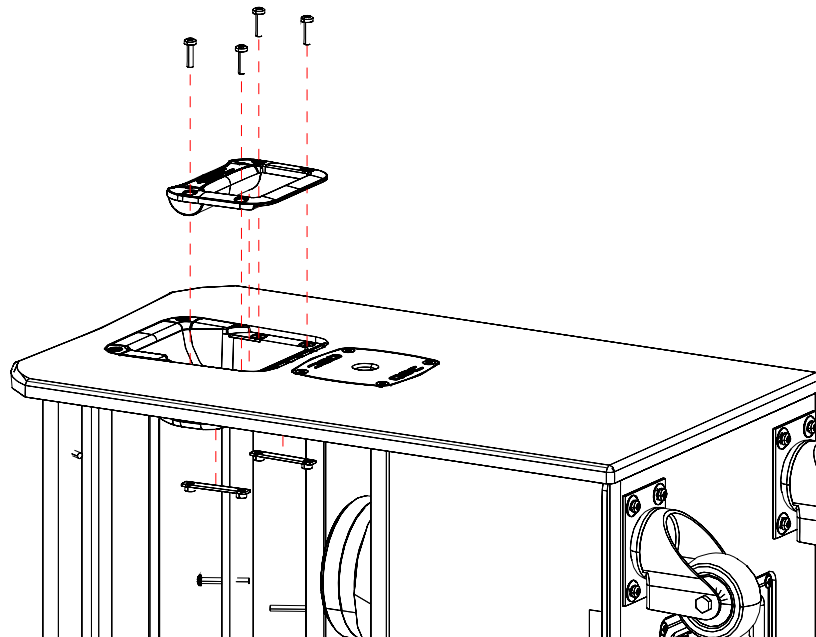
The handle is secured by mounting plates on the interior of the cabinet
